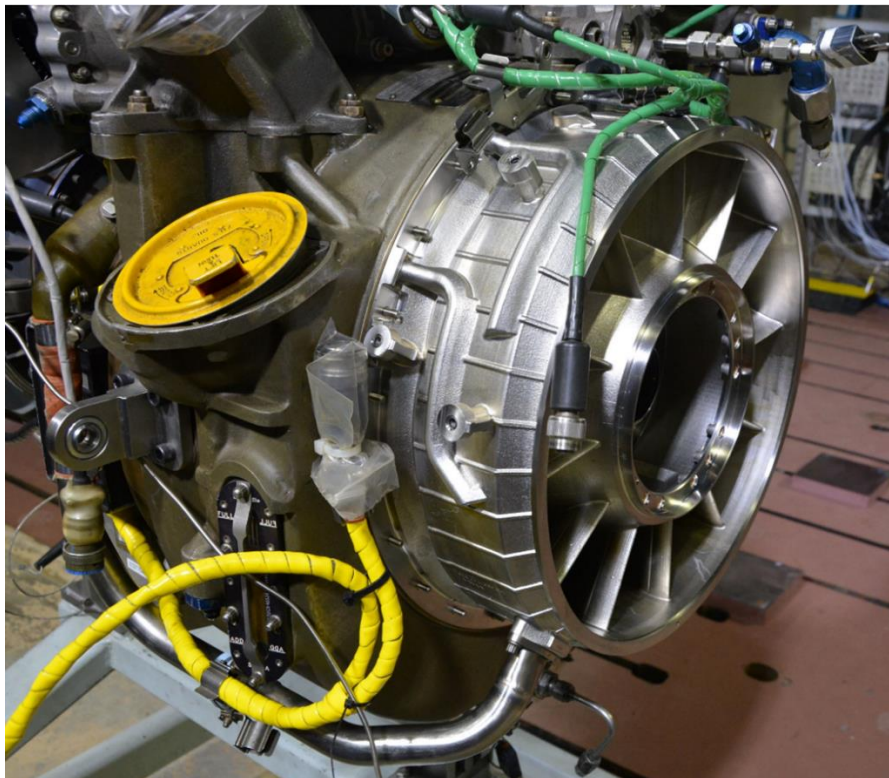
Final Assembly Fit Check – 17A206-230G01 Additive Swirl Frame Installed on U.S. Navy T700-401C Engine
